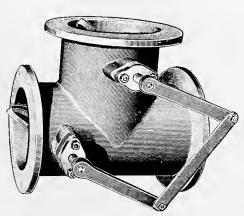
DOUBLE BUTTERFLY VALVE. FLANGED.
